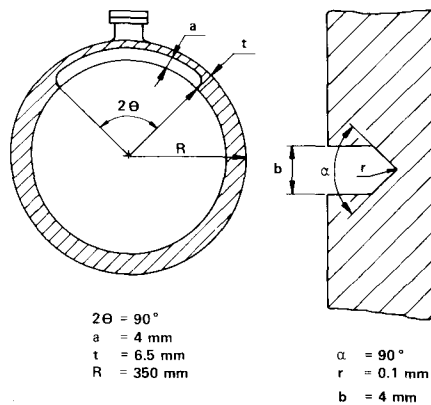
PH pressure vessel and dimensions of the circumferential surface flaw produced into the vessel wall.
